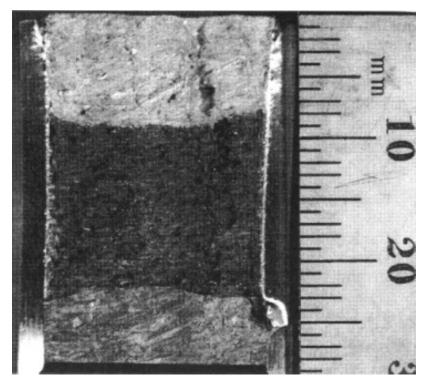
Fracture surface of aged weld metal PWWO tested at 290°C
